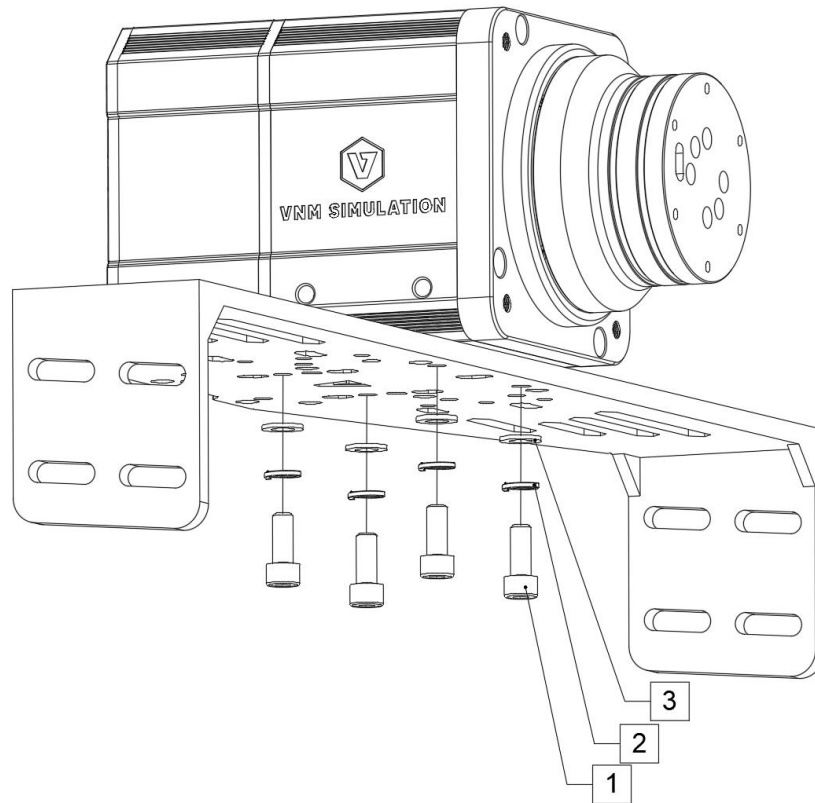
Mounting VNM Wheelbase Premier on bottom mounting bracket.
